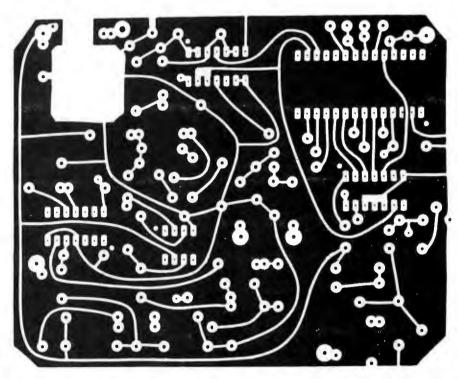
Actual-size foil pattern for "Scope-Ong" is below. Component installation layout is shown a bove.
